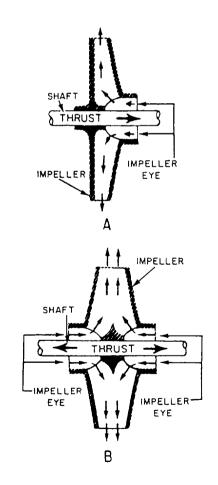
Centrifugal pump impellers. A. Single-suction. B. Double-suction.
